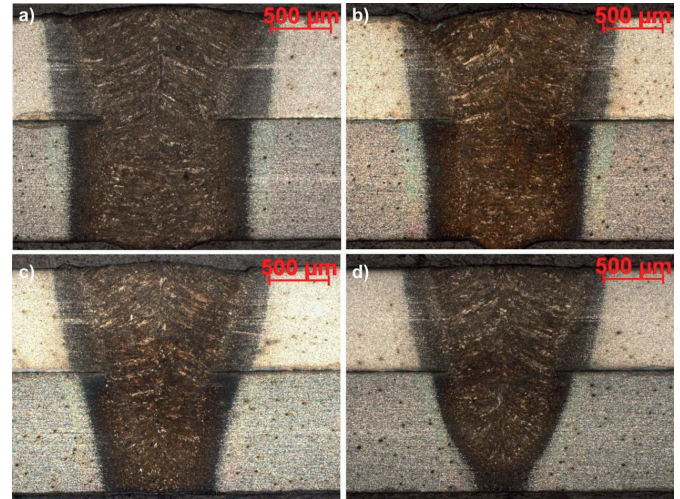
Macrostructure of the joints welded with the following welding rates: a) 8.5 m/min, b) 9 m/min, c) 9.5 m/min, d) 10 m/min; angle between the beams and the direction of welding: 0° ; distance between the beams: 1 mm
